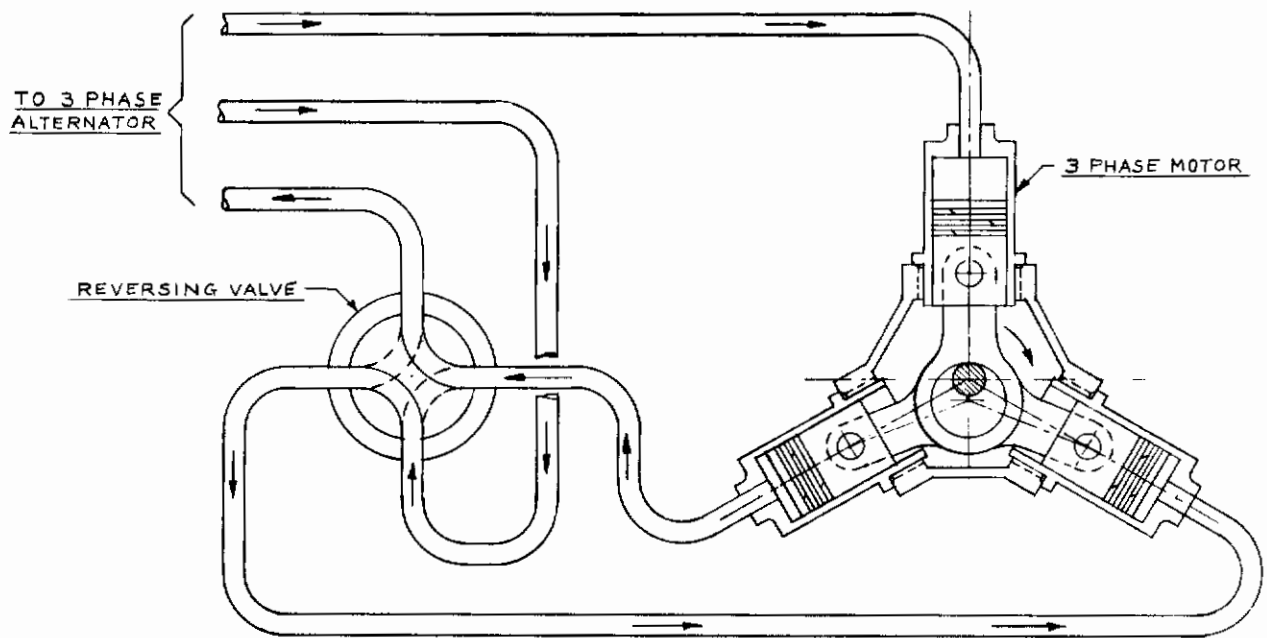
Three-Phase Hydraulic Motor and Reversing Valve
